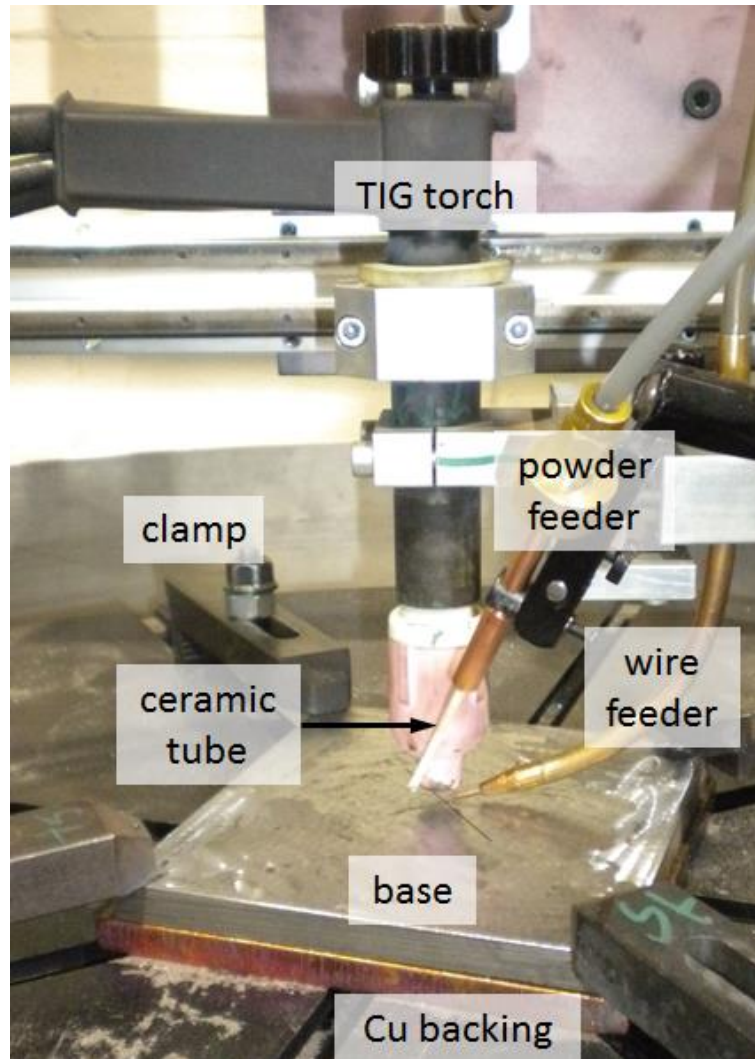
Spiral GTA cladding for POD test specimen; TIG torch for the welding arc; four clamps to maintain the sample position; powder feeder with ceramic feeding nozzle for the WC powder; wire feeder nozzle for the matrix material supply; base as an approximately 140 mm x 140 mm x 12 mm steel plate; Cu backing (10 mm thick) to obtain similar cooling to a brake disc
